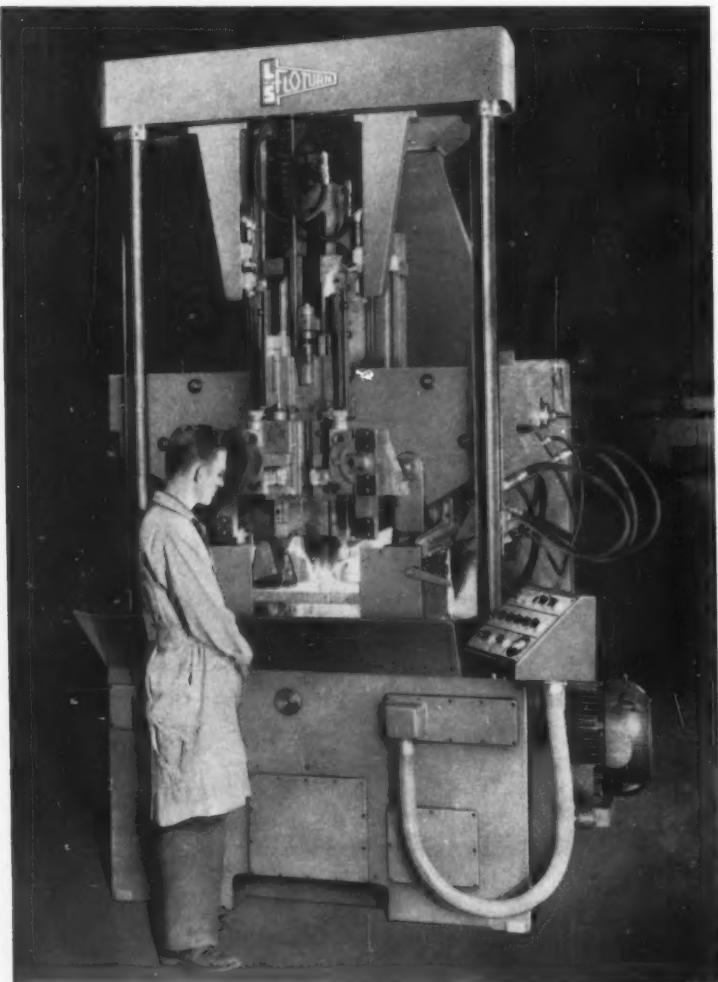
Lodge & Shipley vertical Floturn machine for "chipless" forming of parts up to 15 inches in diameter
